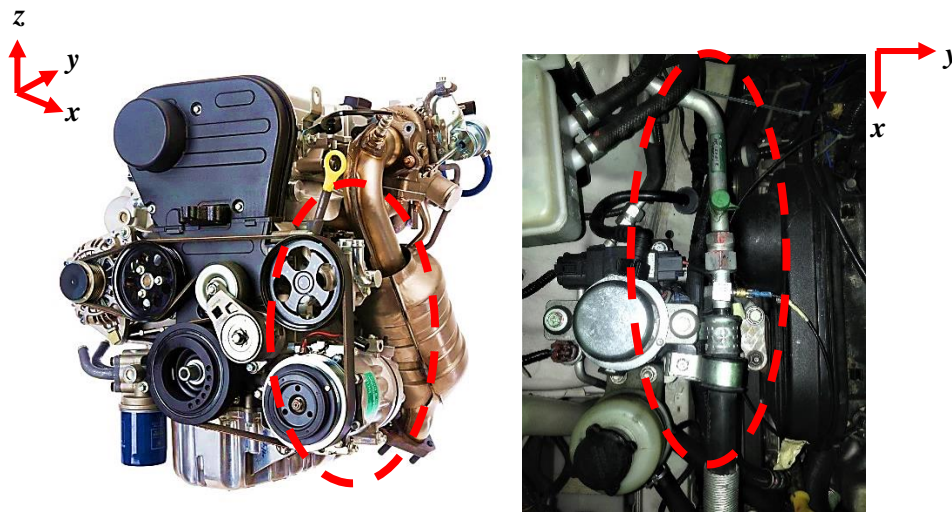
Components assembly position and arrangement. (a) Compressor and power steering pump driven by same belt. (b) AC pipe with mounting attached on vehicle structure.
